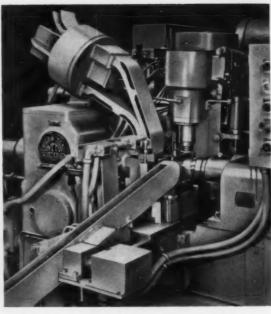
Michigan hobbing machine equipped with automatic parts feeder
